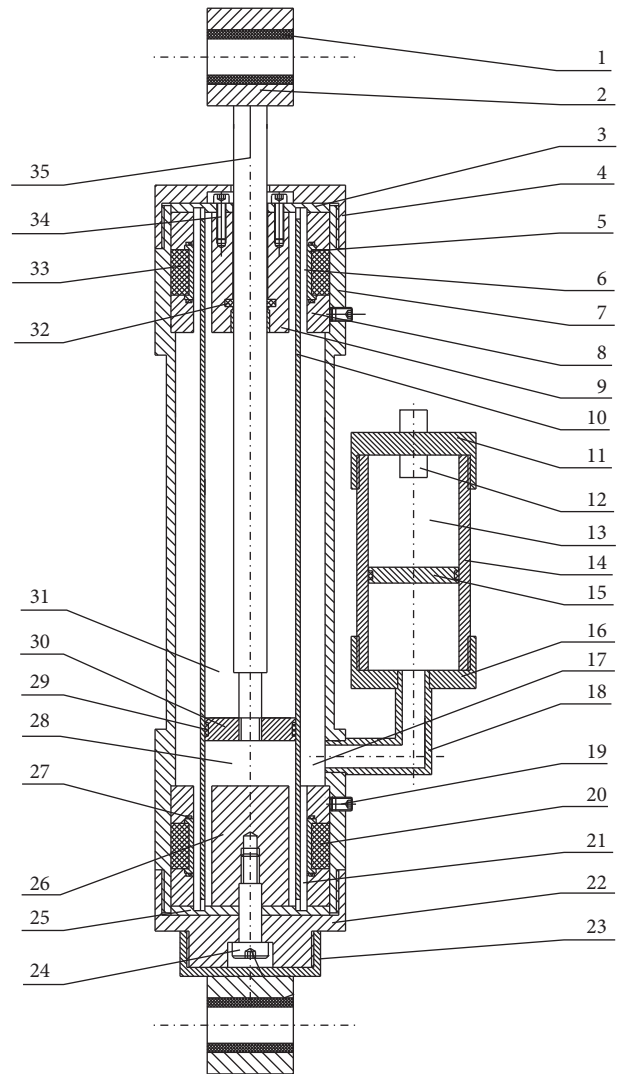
Structural design drawing of an MR damper. 1-ring bushing assembly; 2-upper ring; 3-upper magnetic isolation plate; 4-upper end cover; 5-magnetic isolation ring; 6-upper damping channel; 7-outer cylinder; 8-coil stop; 9-upper stop of piston; 10-inner cylinder; 11-upper end cover of cylinder; 12-charging connector; 13-nitrogen chamber; 14-cylinder block; 15-cylinder piston; 16-lower end cover of cylinder; 17-compensation chamber; 18-conduit; 19-tightening screw; 20-lower coil; 21-lower damping channel; 22-lower end cover; 23-bolt cover; 24-positioning bolt; 25-lower magnetic isolation plate; 26-lower stop of piston; 27-O-type sealing ring; 28-compression chamber; 29-piston seal; 30-piston; 31-recovery chamber; 32-piston rod seal; 33-upper coil; 34-positioning screw; 35-piston rod.
